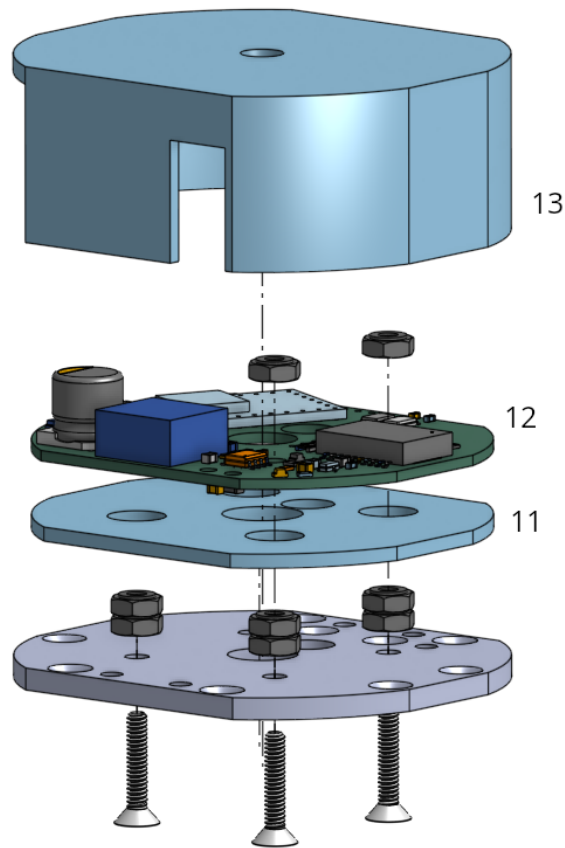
Exploded view of the electrical mounting design. This assembly connects to the top of the elbow joint via the top plate (9). The insulation layer (11) keeps the elbow joint electrically insulated from the PCB (12). The electronics housing (13) protects the PCB and has a hole for the mounting screw to pass through as do all the other components shown (9, 11, 12).
